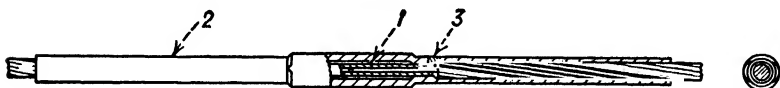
Tubular compression joint for ACSR. (Courtesy Aluminum Company of America.)
